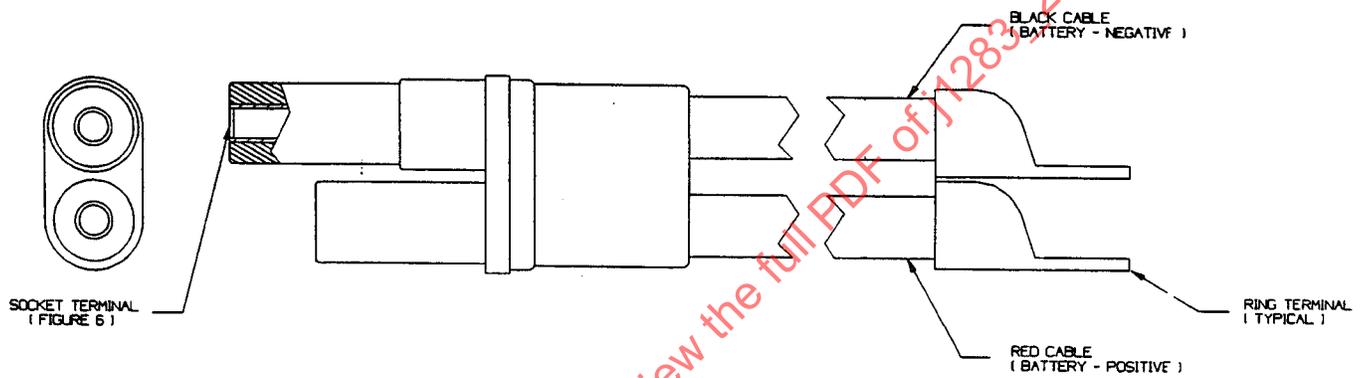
PLUG ASSEMBLY (MACHINE TO BATTERY CART)
